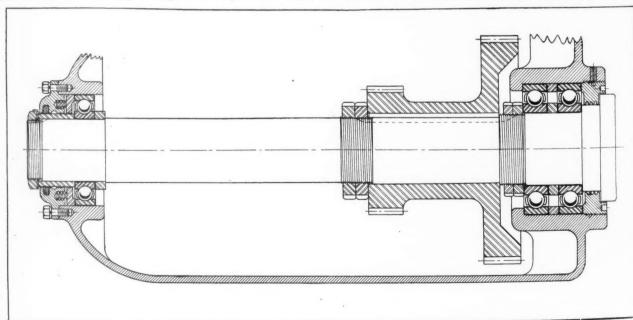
Lathe Headstock Spindle with Three-bearing Mounting
